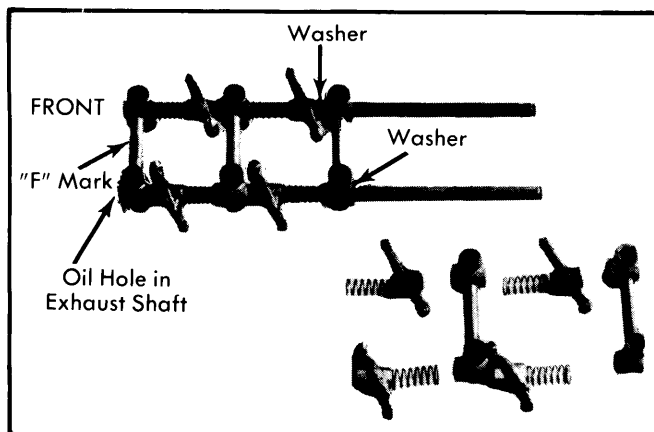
Partially Disassembled View of Rocker Arm Assembly
